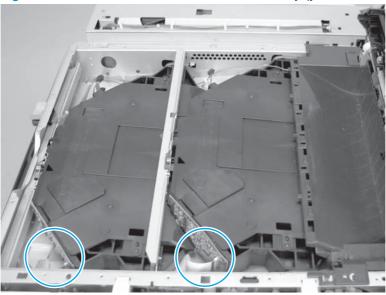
Remove the laser/scanner assembly (yellow and magenta; 6 of 6)
